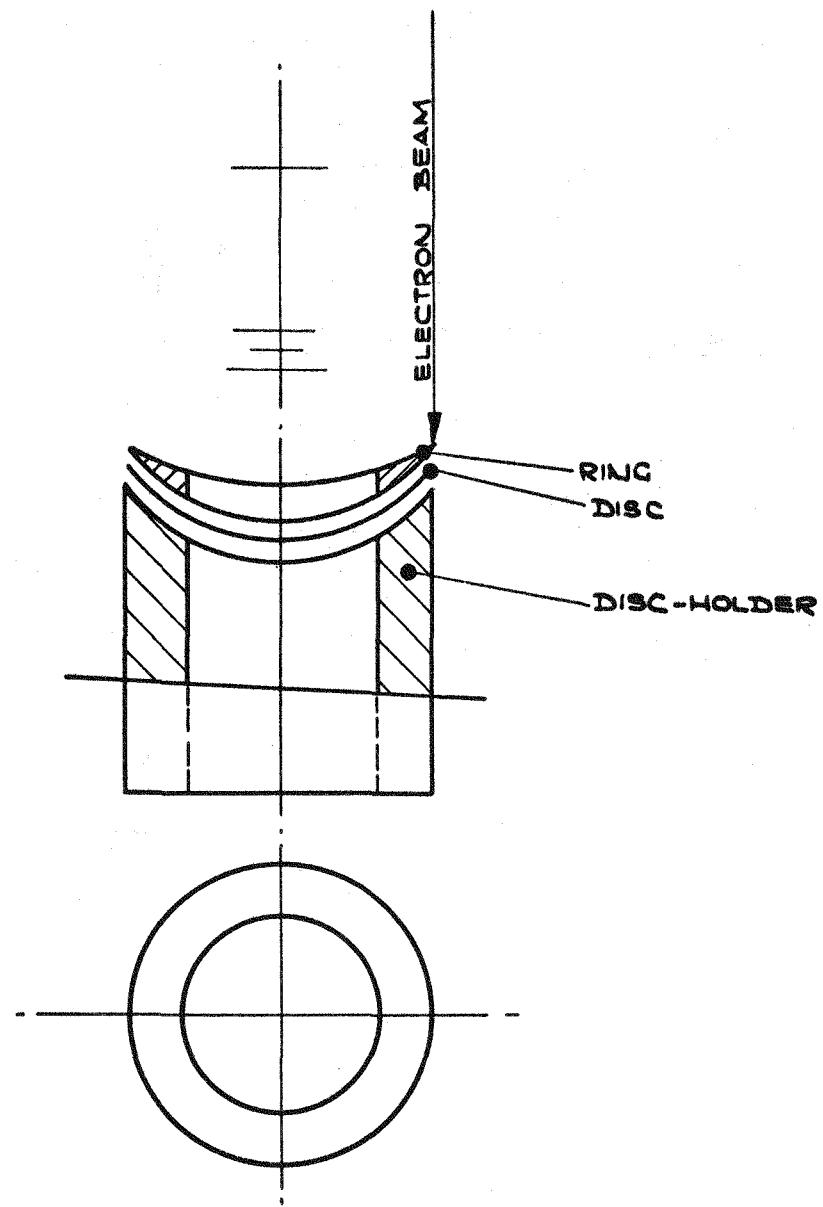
EDGE WELD WITH DOMED RING
